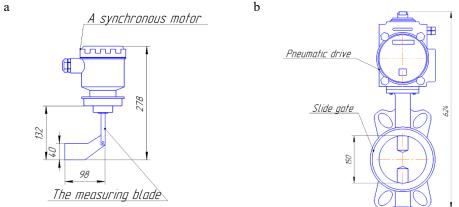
Selected equipment for automated sand-feeding hose, a – rotary level gauge; b – slide gate with pneumatic drive.
